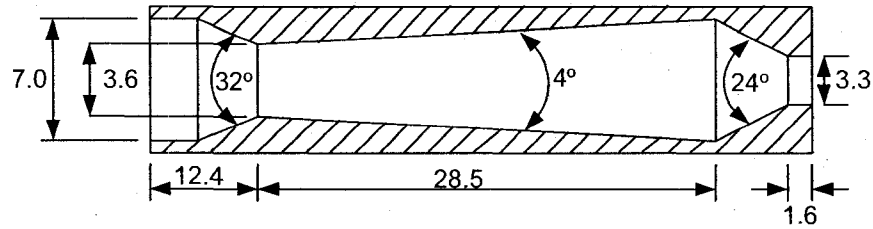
Drawing showing nozzle geometry and nominal nozzle dimensions of the SS-1.0. (Dimensions are in millimetres)
